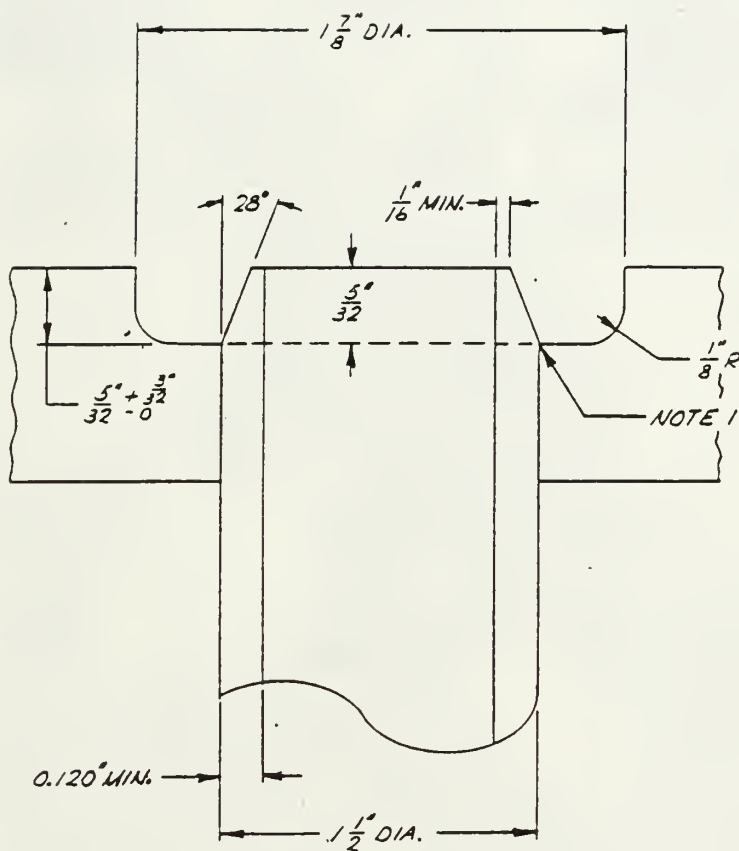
illustrates a cross section view of the superheater header which shows the orientation of the tube holes. The counterbore dimensions are indicated on the drawing as well as the arrangement of the tubes with respect to the header. Figure 2.5 offers an expanded view of the header/tube attachment region. As shown, the counterbore has a 1/8 Inch radius of curvature. It should be noted that Figure 2.5 is not to scale and therefore offers a distorted view of the region. Using the dimensions provided in Figure 2.5, Figure 2.6 was then constructed to scale using a scale of 30.449:1. Figure 2.6 was utilized to obtain the coordinates needed to define the geometry of the region for modelling purposes. The shape of the top surface of the weld is restricted not to exceed 1/16 Inches above the surface of the header in [Ref. 1: Page A-18]. As shown in Figure 2.6, a circular arc was chosen to describe the top surface of the weld.
